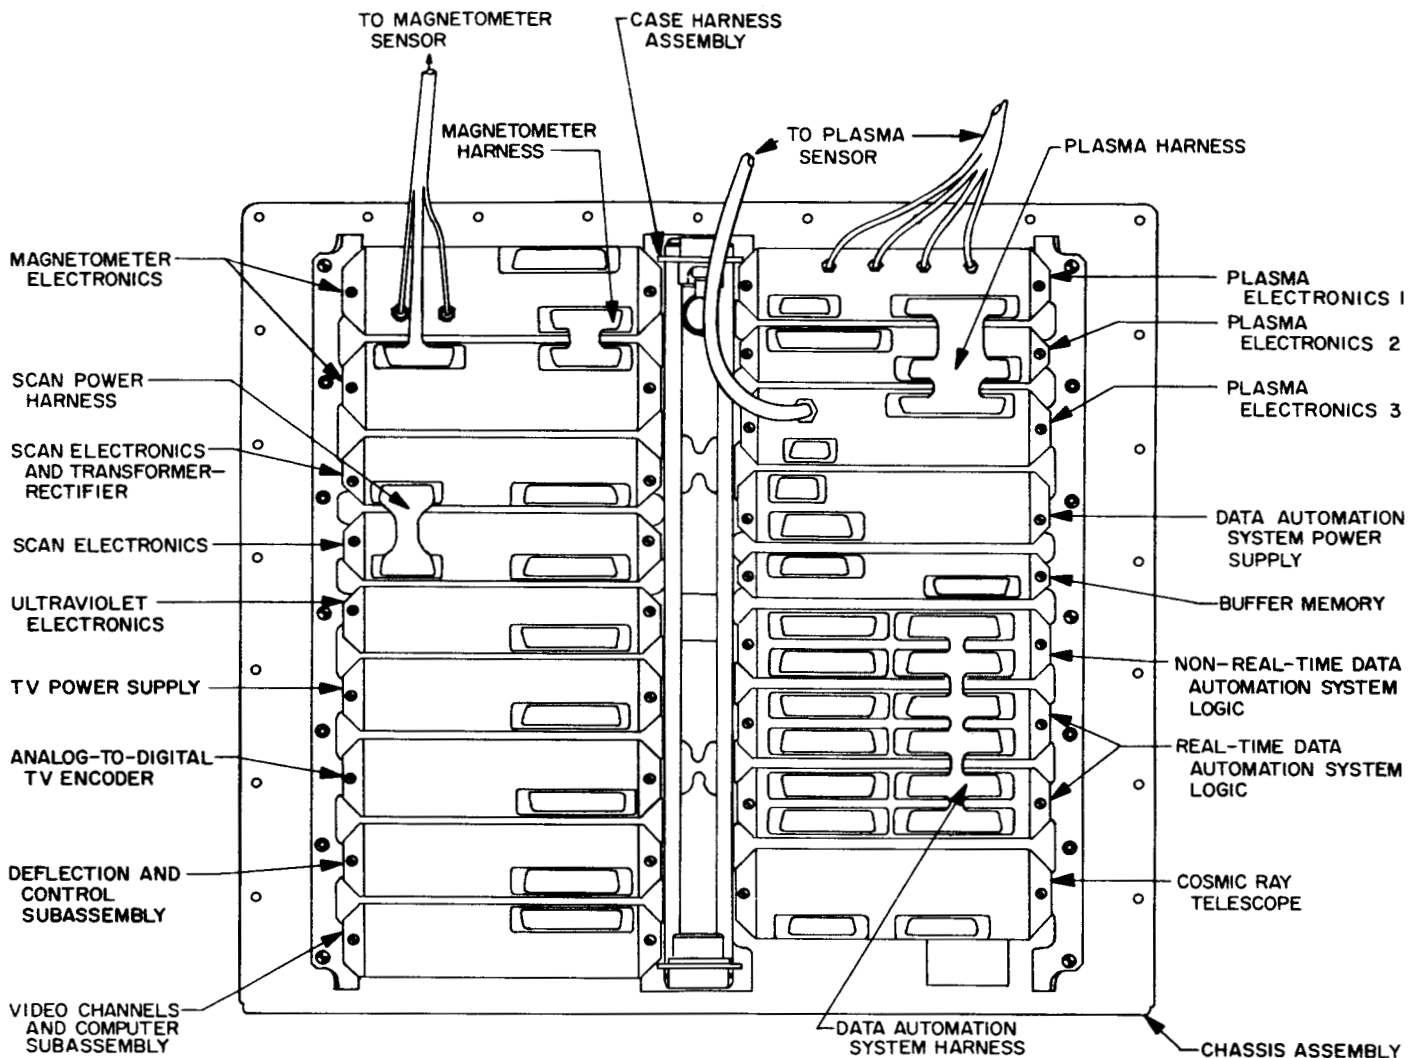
Layout of Assembly III (scientific equipment electronics)
